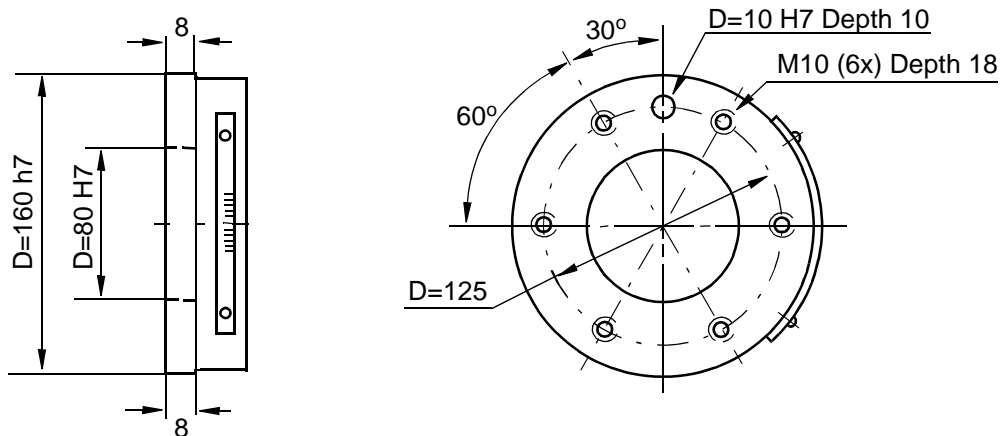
The mechanical interface (mounting flange) ISO 9409 (dimensions in mm).
